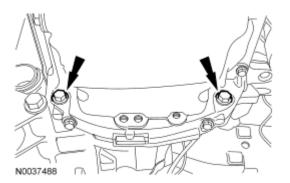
Locating Oil Pan-To-Bellhousing Bolts Courtesy of FORD MOTOR CO.
